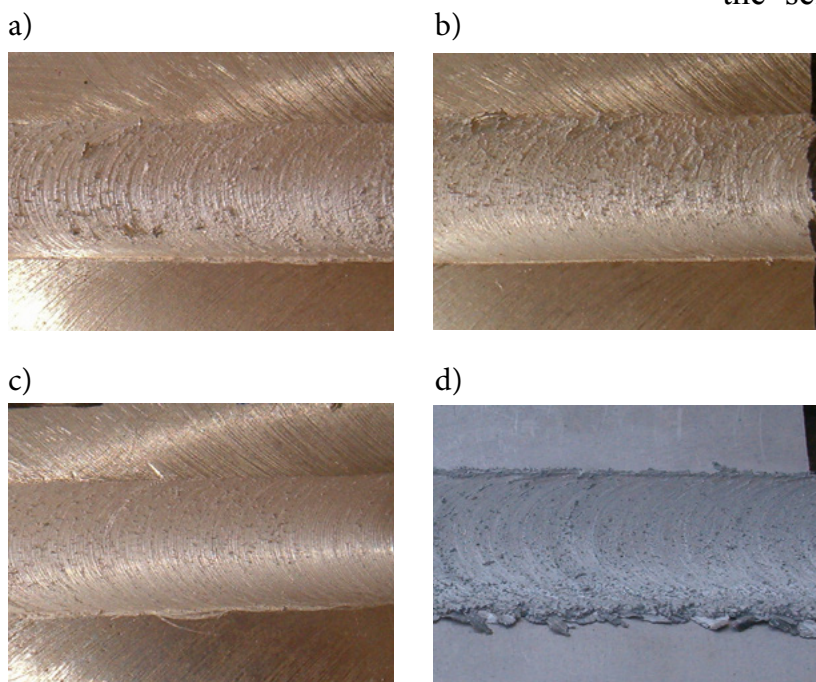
View of the joints made of casting aluminium alloy EN AC-43200. Welding parameters:  $V_n$  [rev./min] /  $V_z$  [mm/min]: a) 500/200, b) 700/200, c) 900/200, d) 1300/200,
